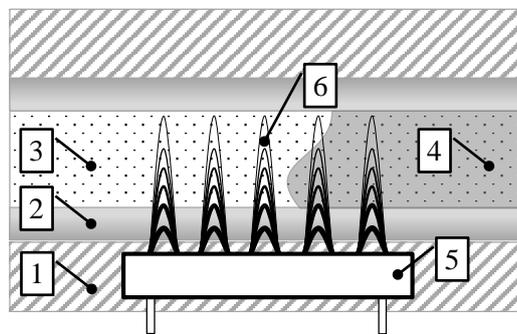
Side view of FEF sensor installed in the mould wall. (1-mould, 2-gelcoat, 3-fabric, 4-fabric&resin, 5-sensor, 6-FEF);
